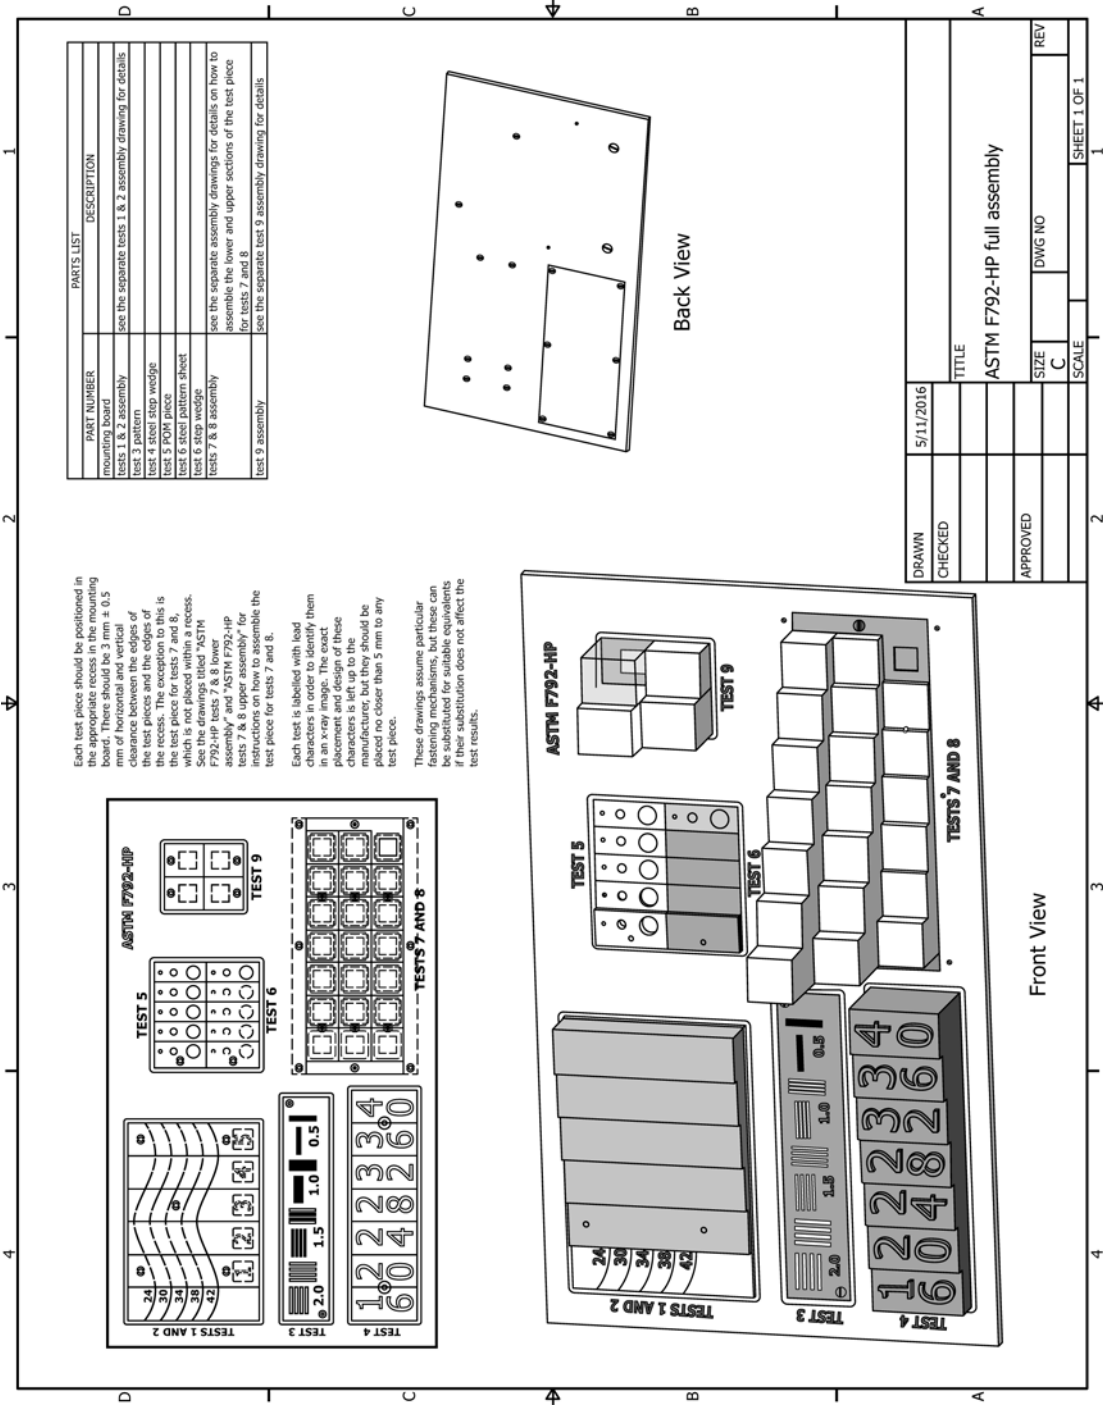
Practice F792 – HP Mechanical Drawing
